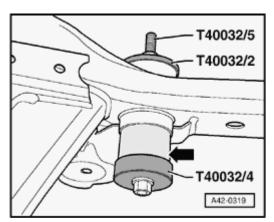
Using Removal And Assembly Tool T40032 To Remove Differential Mount Courtesy of VOLKSWAGEN UNITED STATES, INC.
